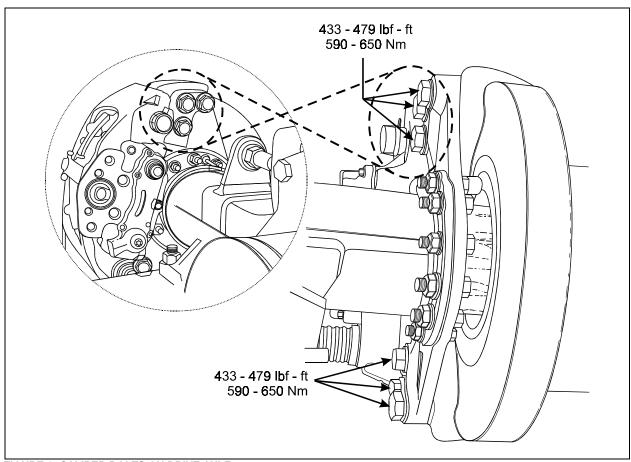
CALIPER BOLTS ON DRIVE AXLE
